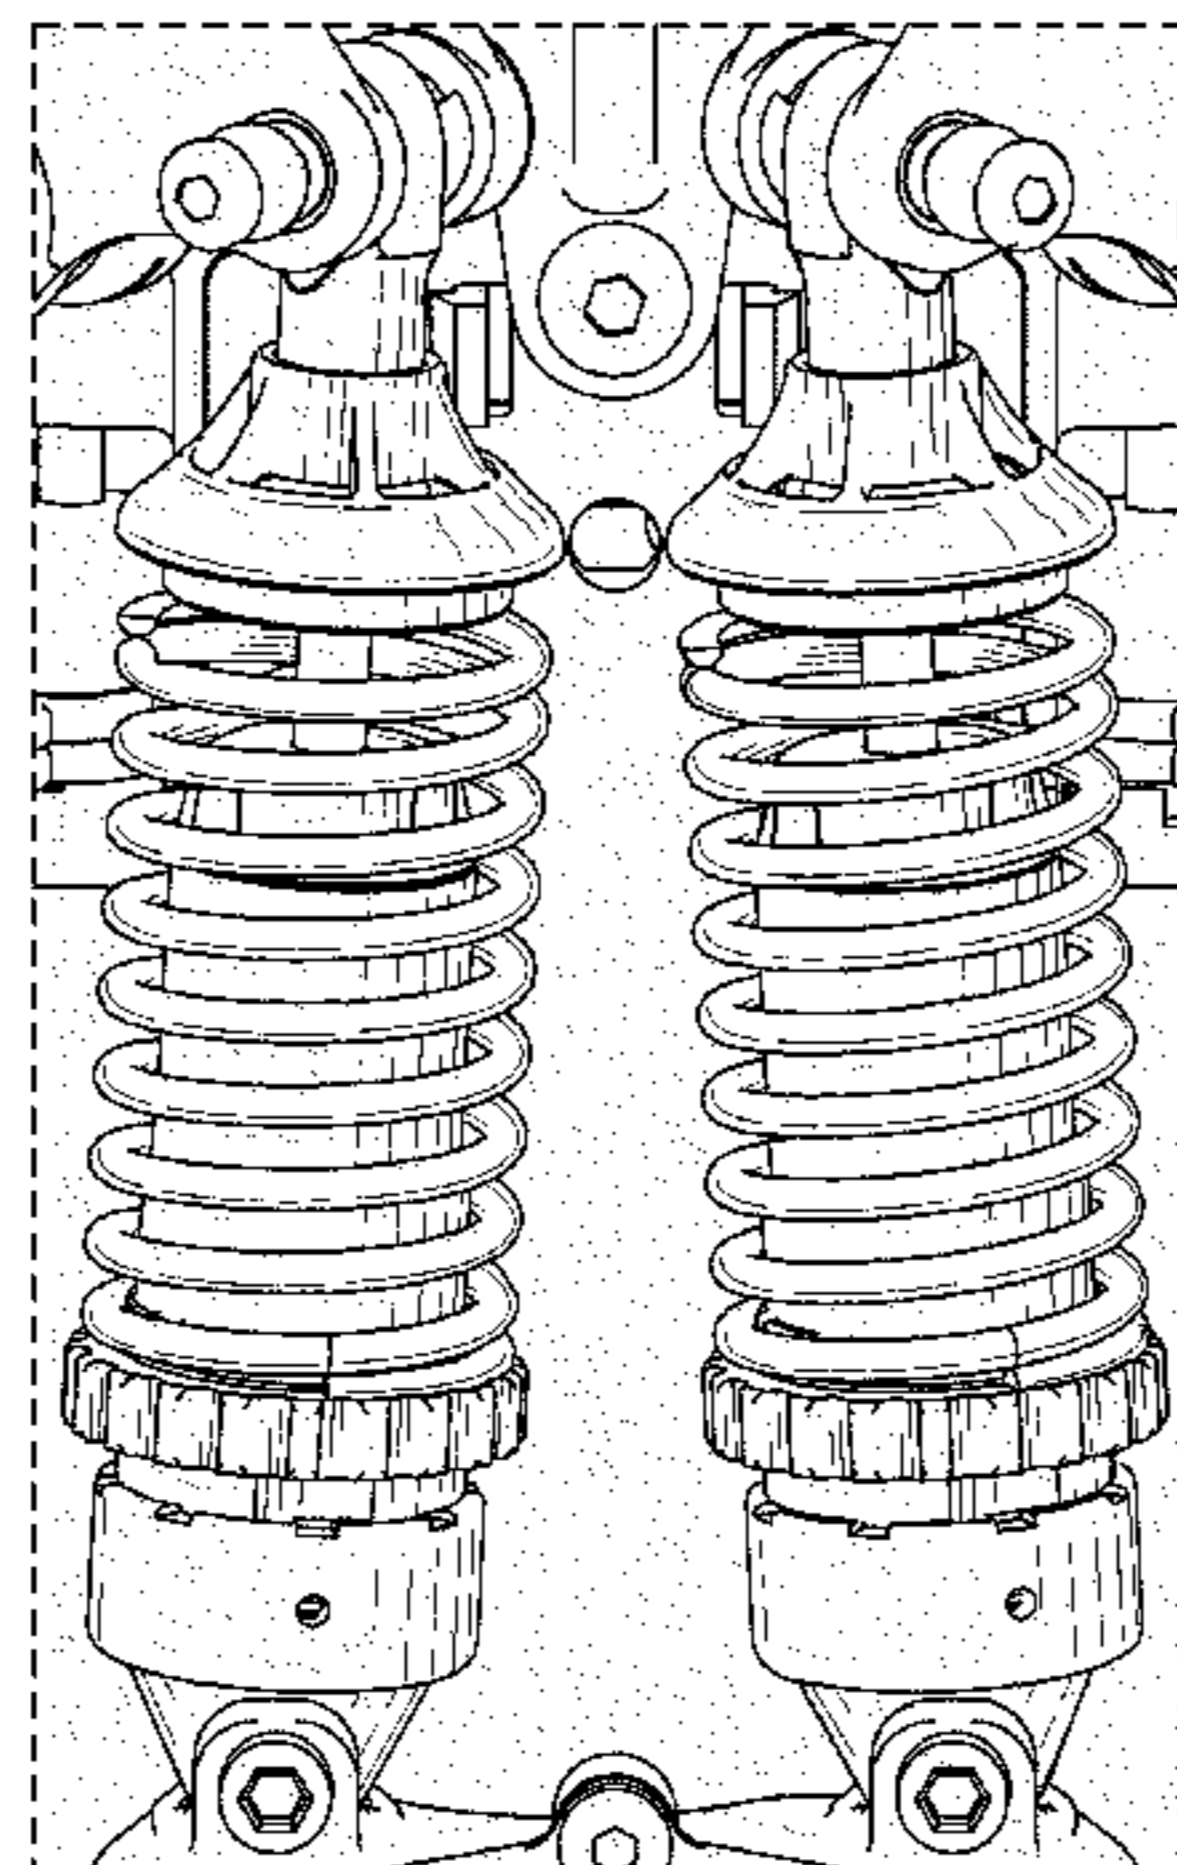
is an enlarged partial view showing the vehicle mounted coil spring and shock assembly from the top.
